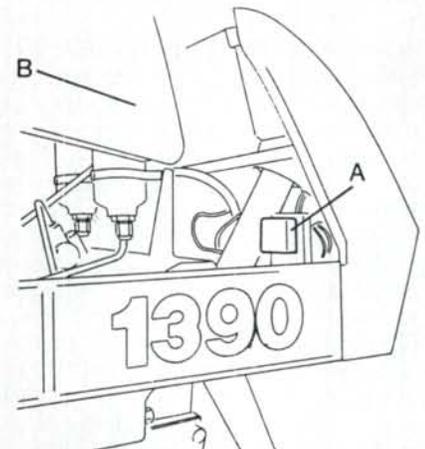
Engine cover (B) must be raised to gain access to fuse holder (A) on models not equipped with cab.
